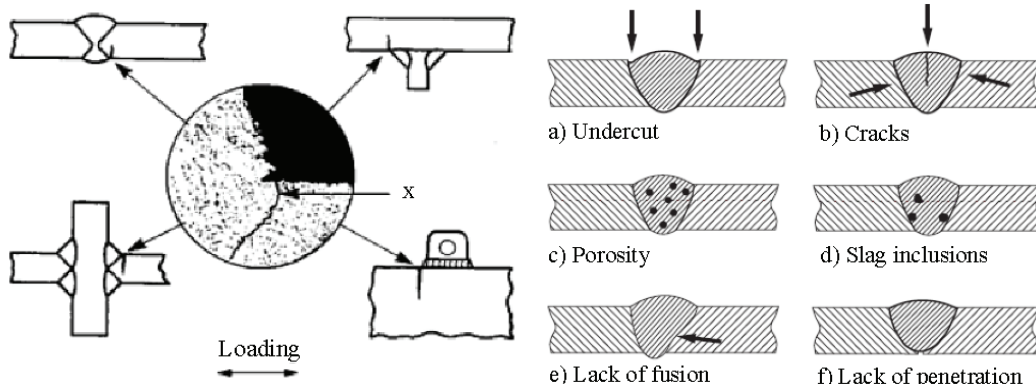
Stress-concentration regions weldments Figure 3: Defects and cracks in welded joint
